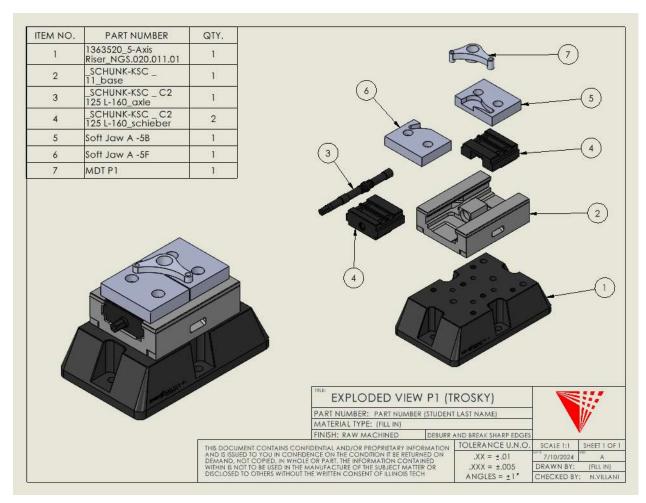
Exploded View of P1 Vice and Riser Assembly
